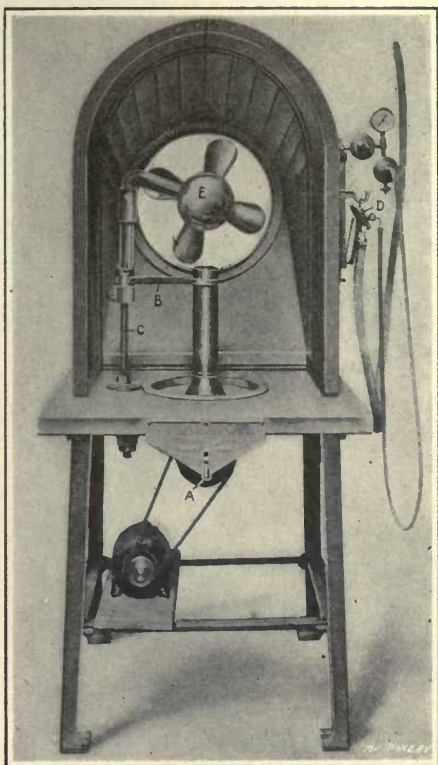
De Vilbiss Spraying Device used in coating Exterior of High-explosive Shells
